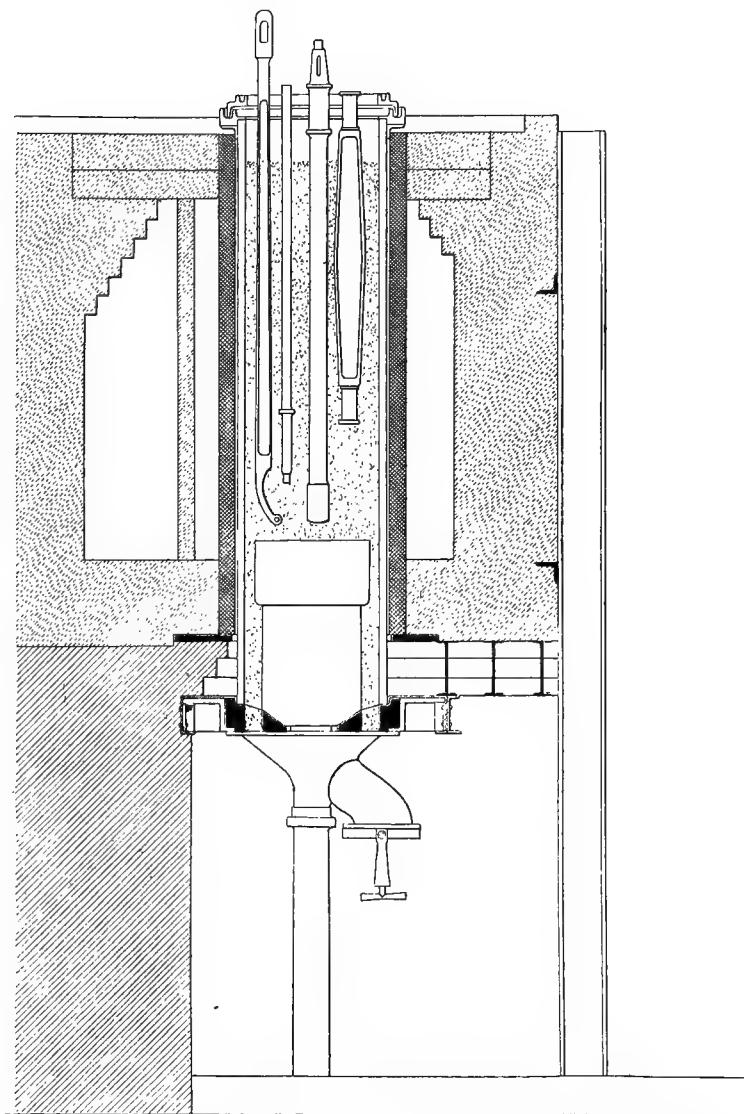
Furnace of Type shown in Fig. 9 charged with Pieces to be Case-hardened.
